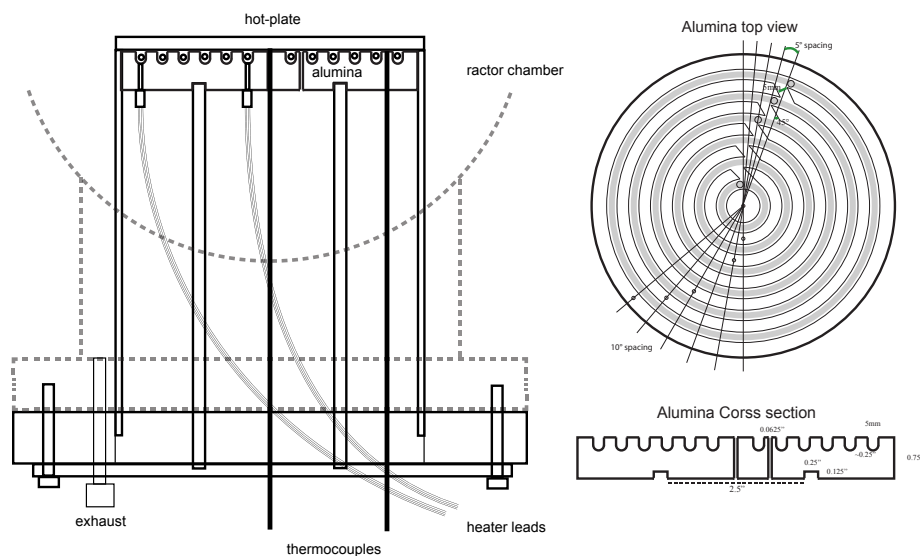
Diagram of bottom flange assembly and alumina ceramic heater.
